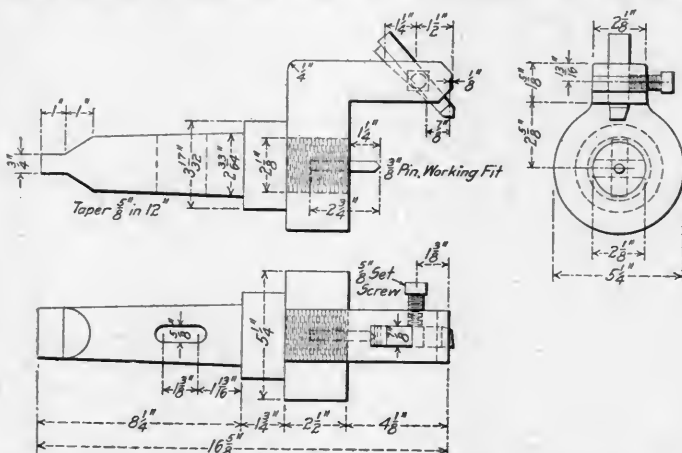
Boring Mill Tool for Turning Surfaces Which Cannot Be Handled in a Lathe
